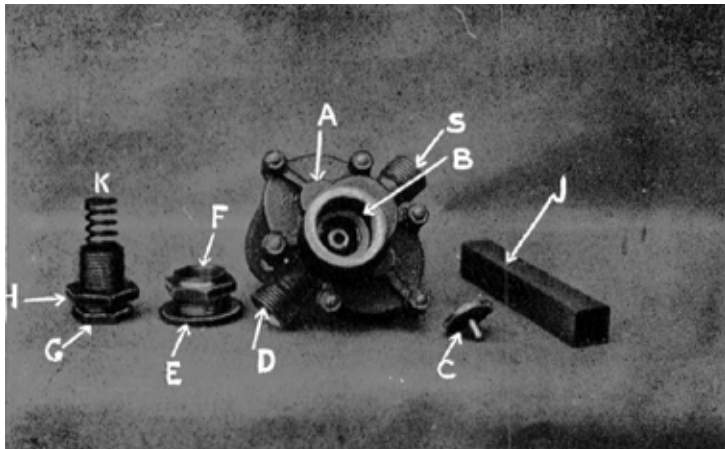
ENGINE OIL PUMP DISMANTLED.
